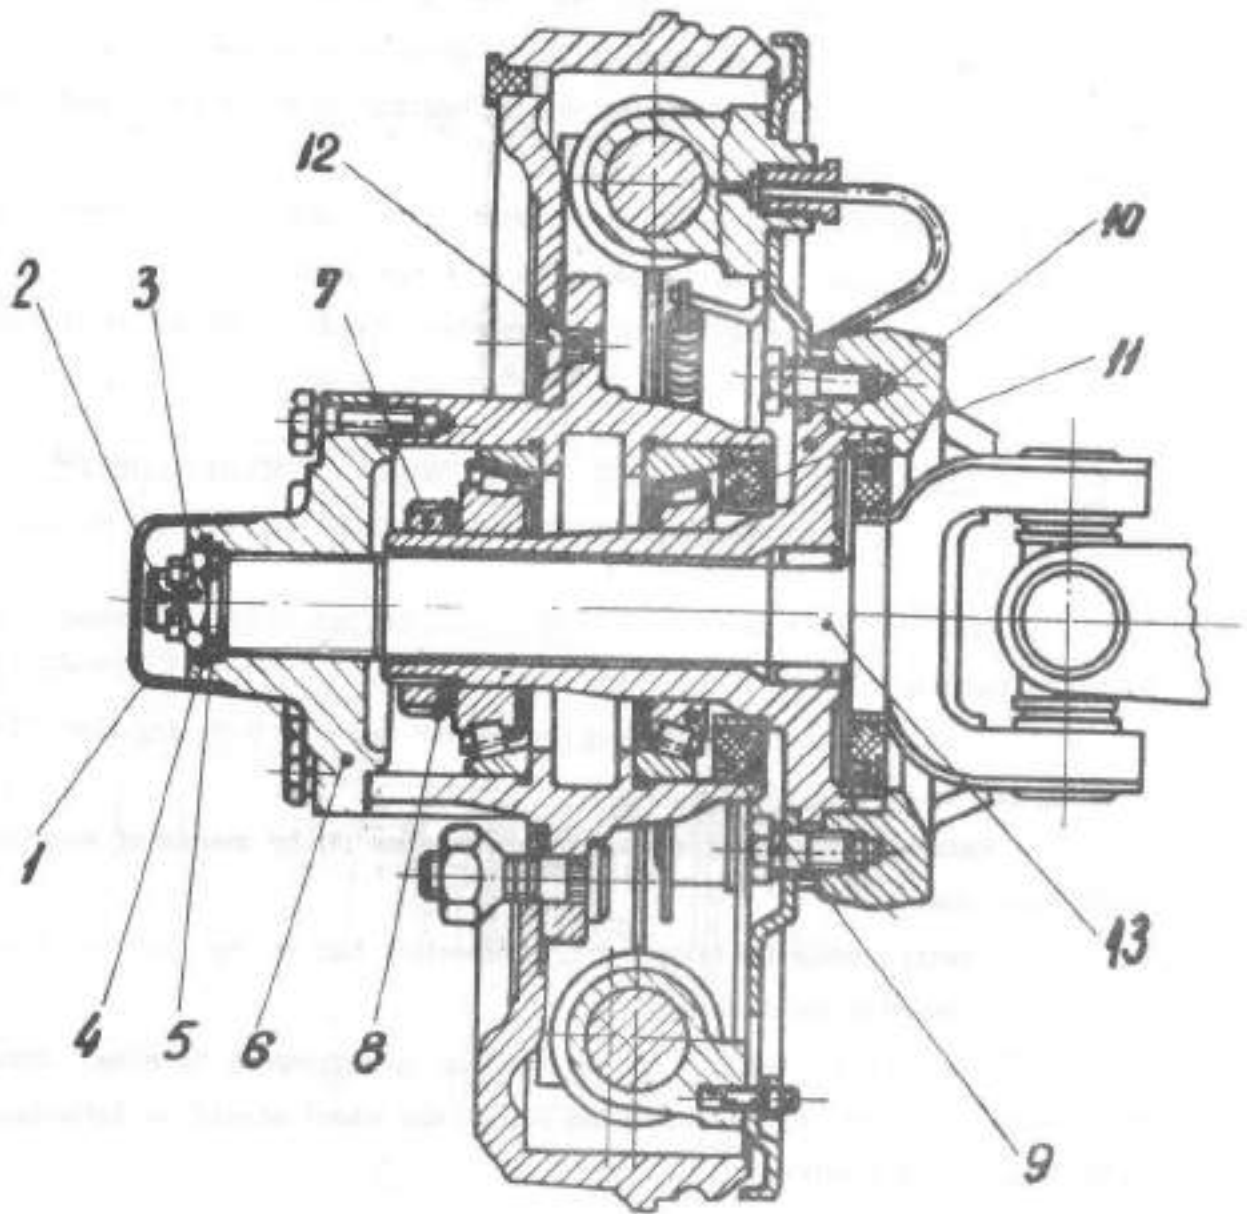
FRONT WHEEL BRAKE DRUM KING PIN ASSY.
